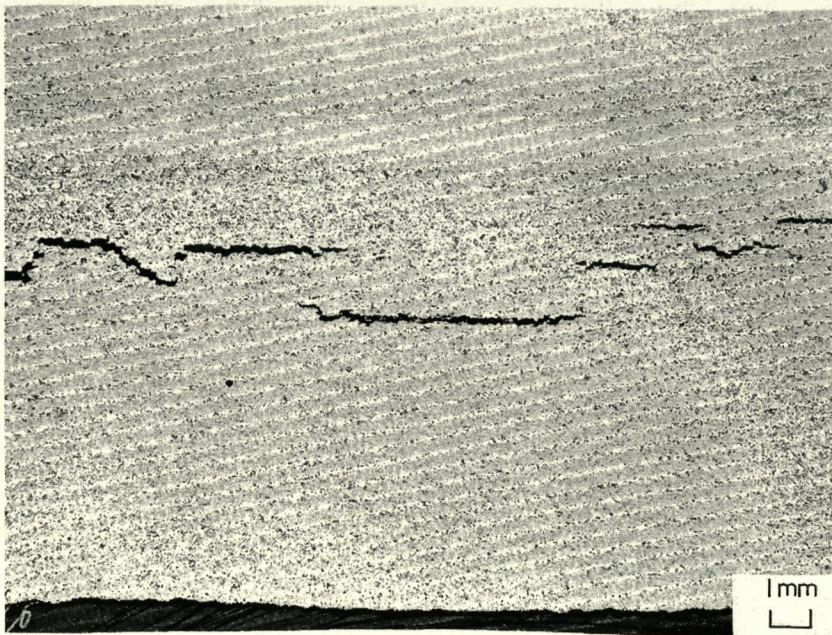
Typical Hydrogen Induced Cracking in Pipe-Line Steel⁽⁴⁶⁾.
